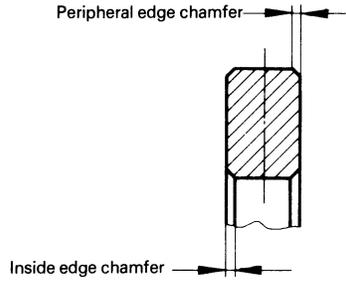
SECTION OF STRAIGHT-FACED RECTANGULAR RING
